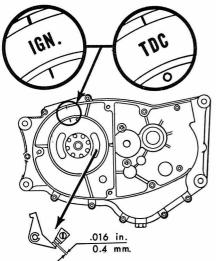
When notch on flywheel is aligned with notch on crankcase, crankshaft is positioned for correct ignition point. When "O" on flywheel is aligned notch in crankcase, piston is at TDC.
